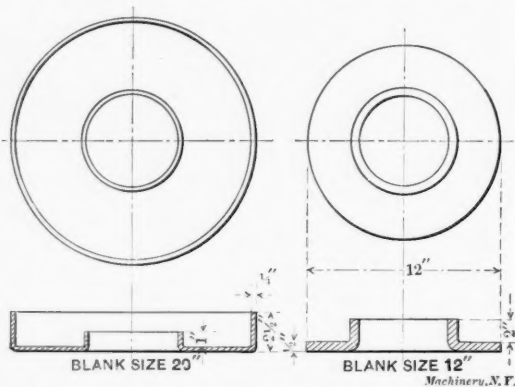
Samples of Work, Stamped Cold in the Machine shown above.
